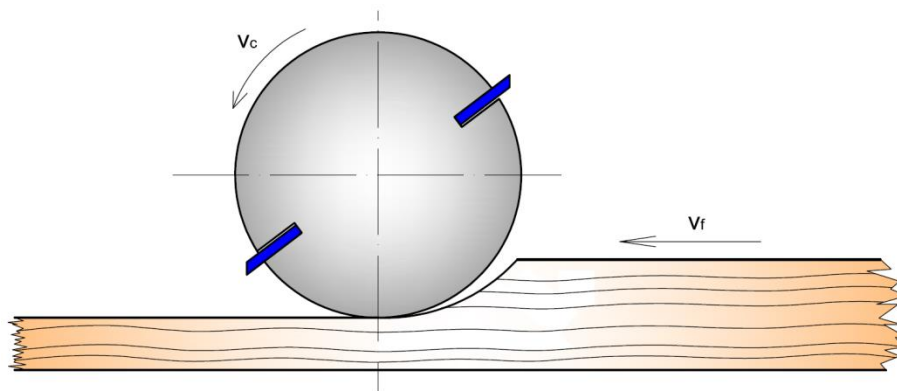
Principle of plain milling (v_c – cutting speed/rotation direction of tool, v_f – feed speed/direction of wood motion during milling)
